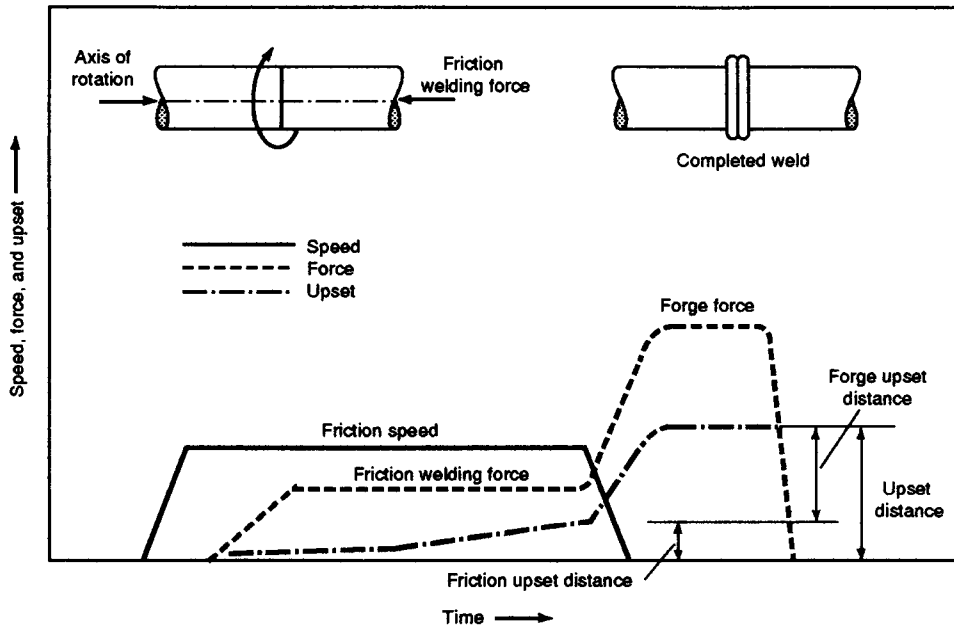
Direct-drive friction welding parameter characteristics. Source: ANSI/AWS C6.1-89
